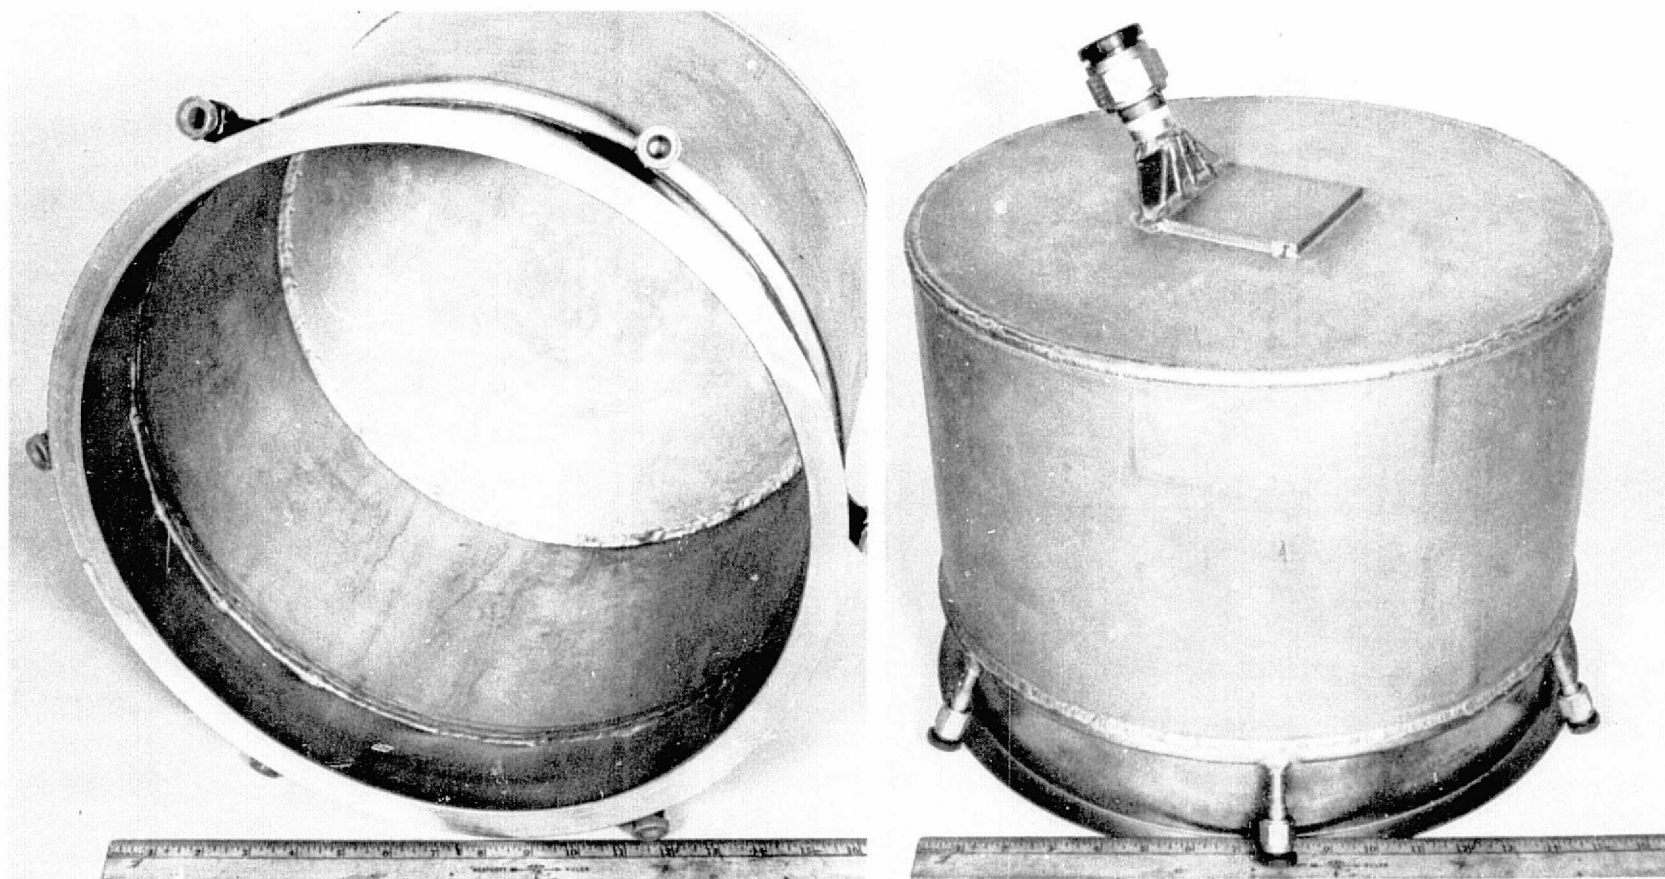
PROTOTYPE 3 FLASH EVAPORATOR
